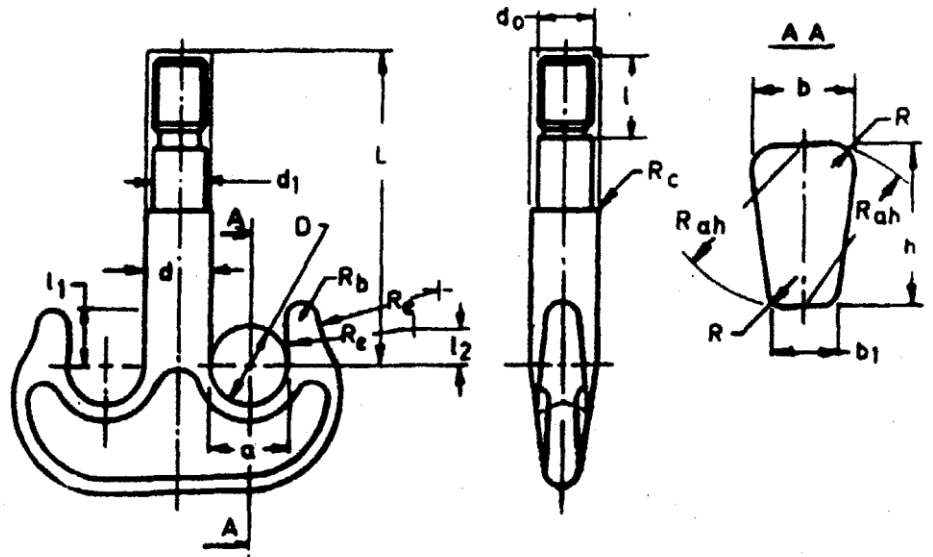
DIMENSIONS OF FORGED RAMSHORN HOOK
